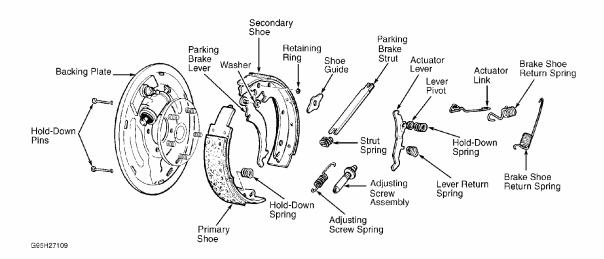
Exploded View Of Rear Brake Shoe Assembly (Except, Montana, Silhouette & Venture)
